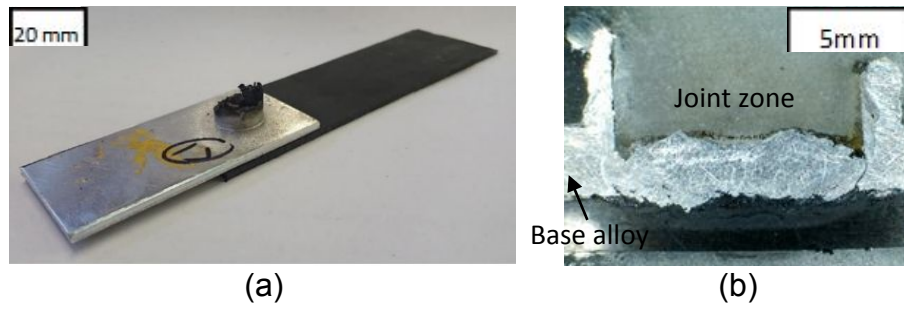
(a) A joint produced using a shoulder-less design with expelled Al alloy (b) a cross sectional view of expelled Al alloy.
